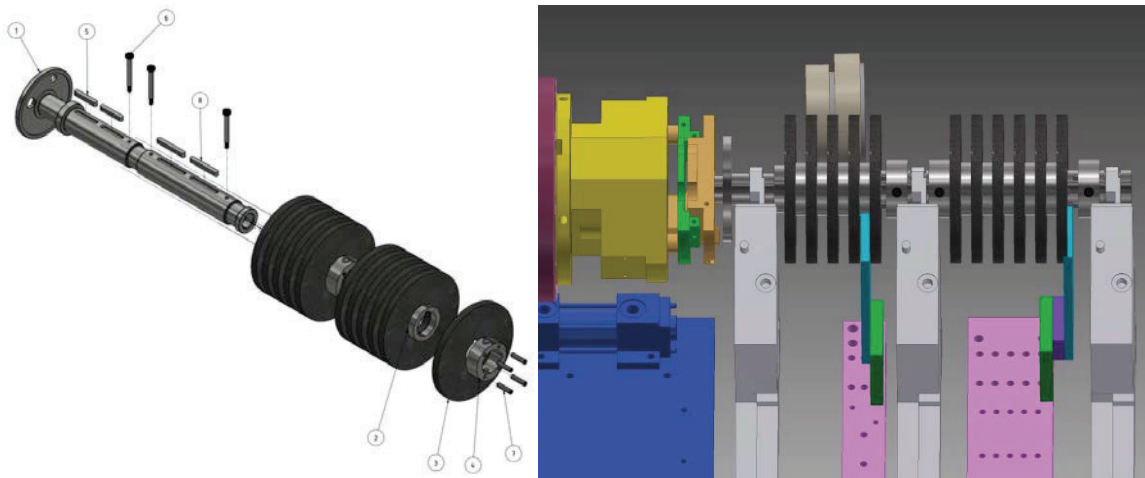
LEFT: Special fixture design for rotary samples, RIGHT: Fixture model in the grinding machine.
